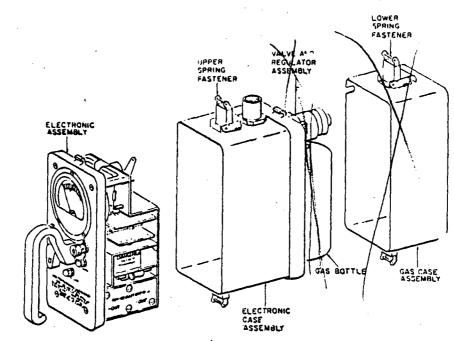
Electronic assembly removed in Contract Case assembly.
